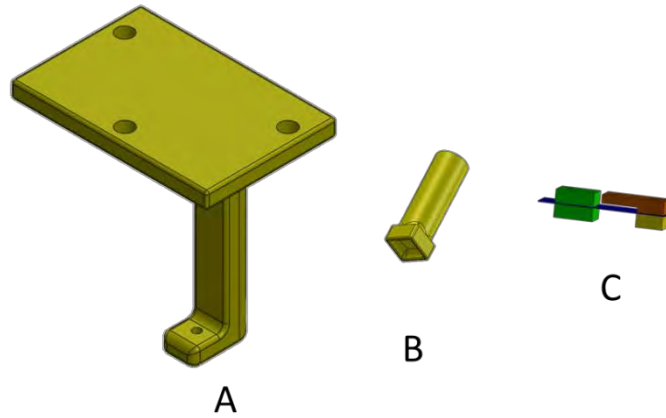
Initial Designs: (A) load cell mount; (B) push rod; (C) thin-beam load cell
